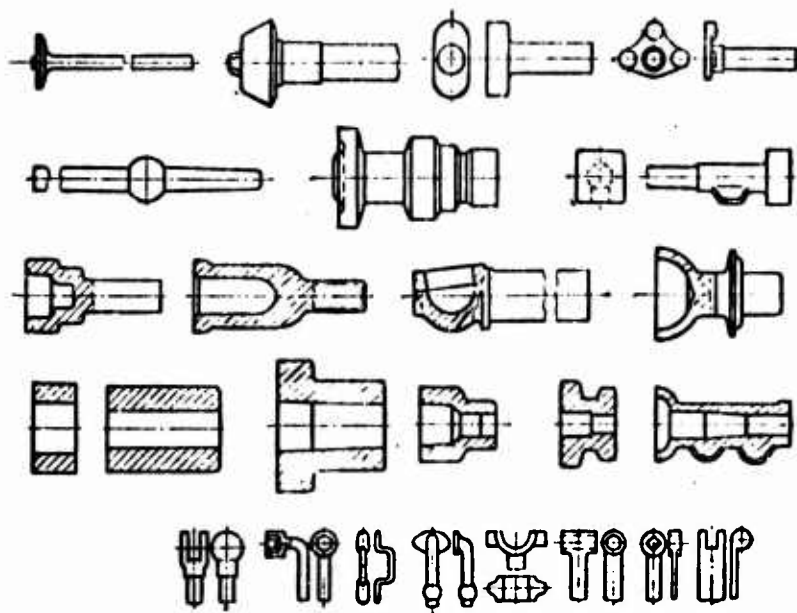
Examples of forgings, stamped on horizontal-forging machines.
